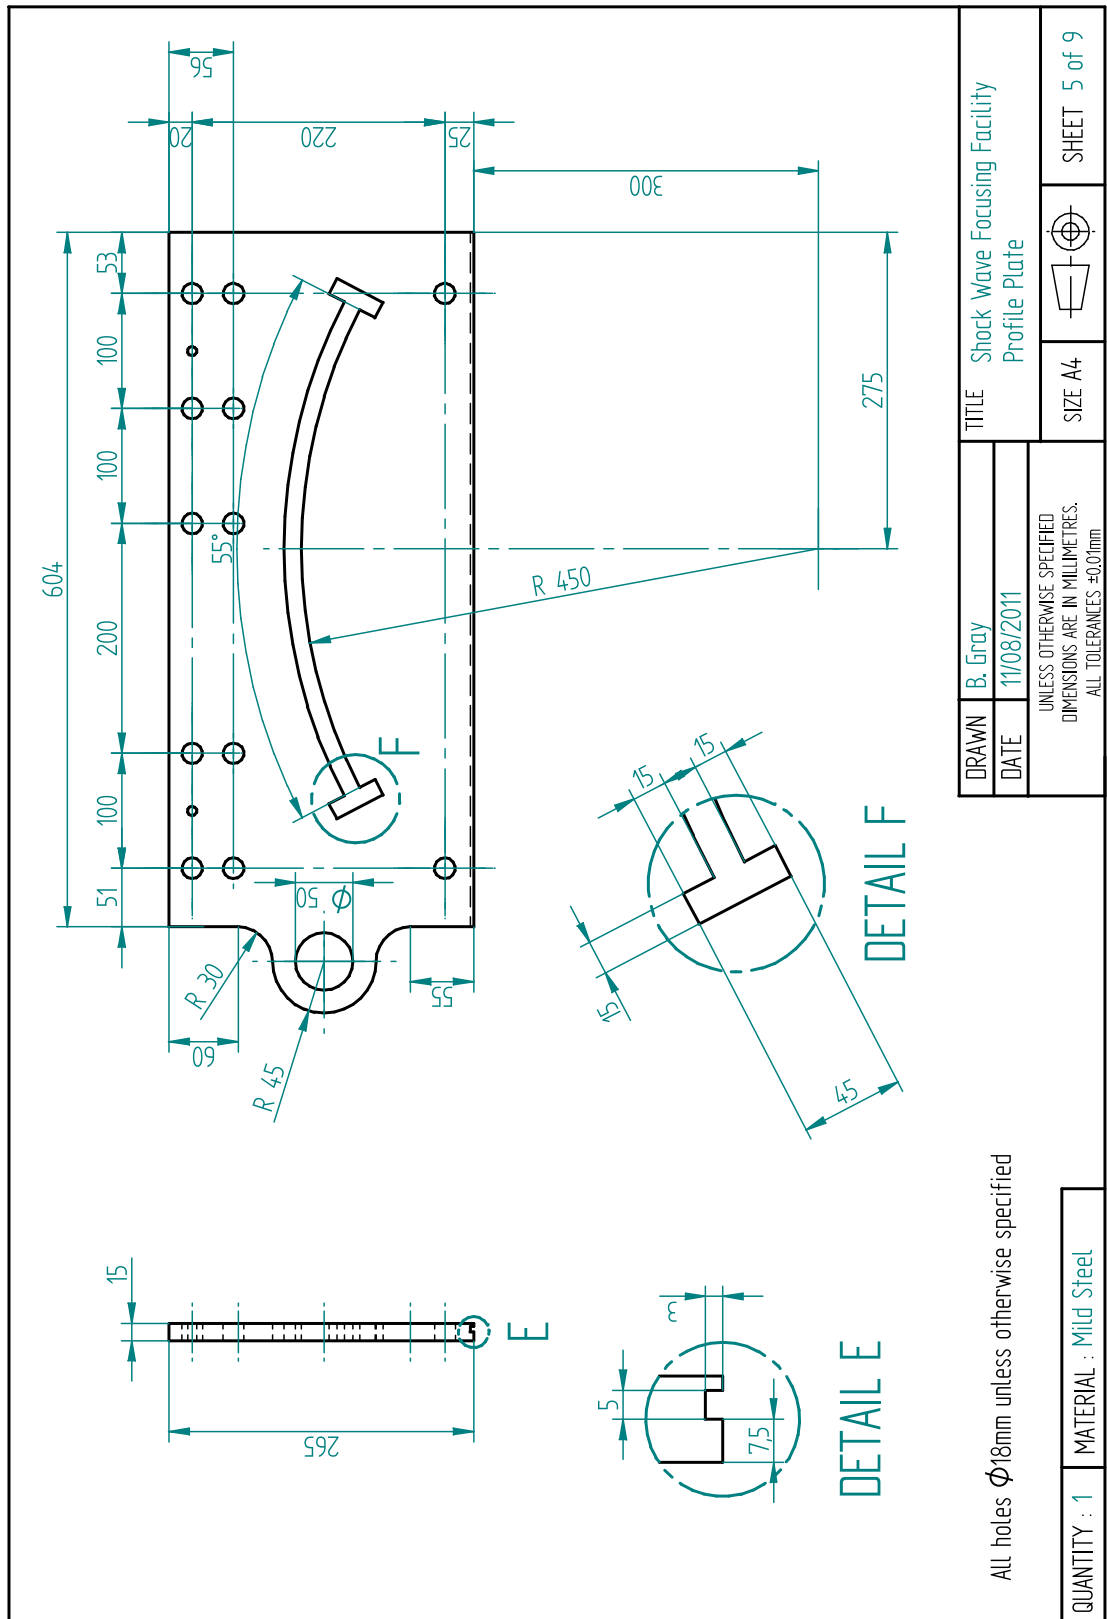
Engineering drawing of the profile plate for a 450mm initial radius converging shock
